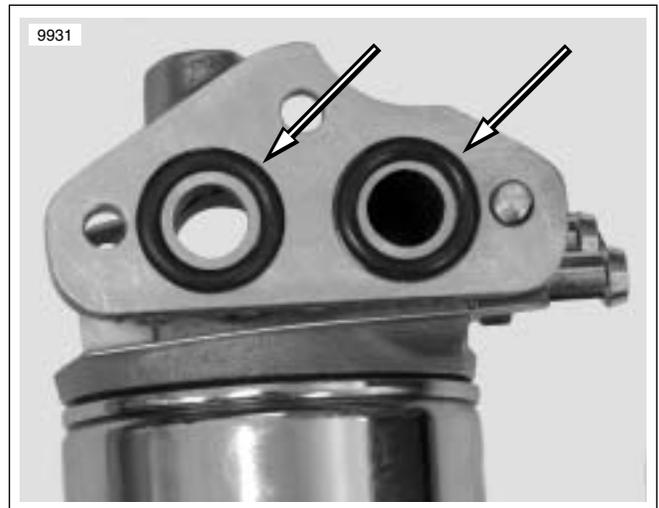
Oil Filter Mount O-rings (thermostat removed)
